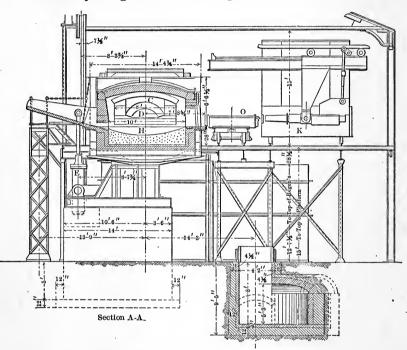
End elevation and section of tilting open-hearth furnace.
